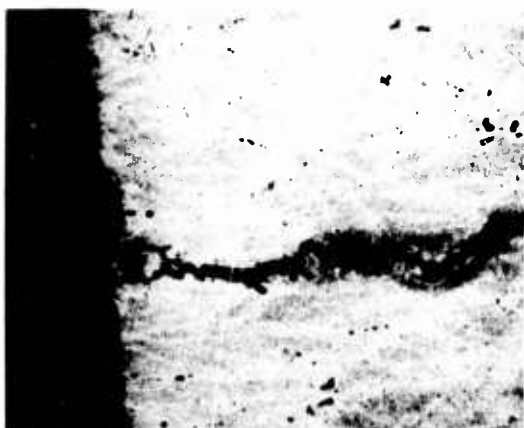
Typical Spar Crack with Pit - 50X (KSC photo)
